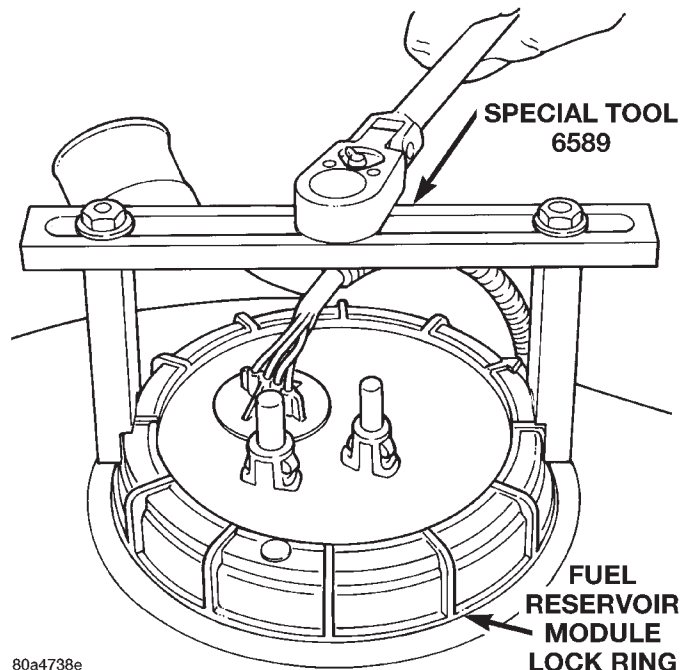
Fuel Reservoir Module Lock Nut Removal
